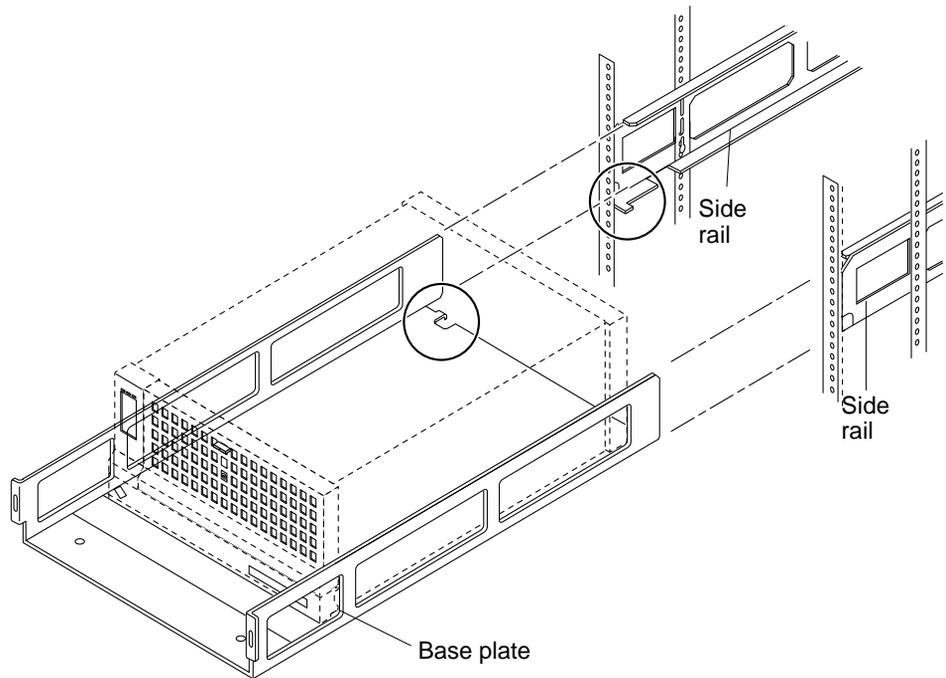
Aligning the Chassis and Baseplate With the Side Rails
